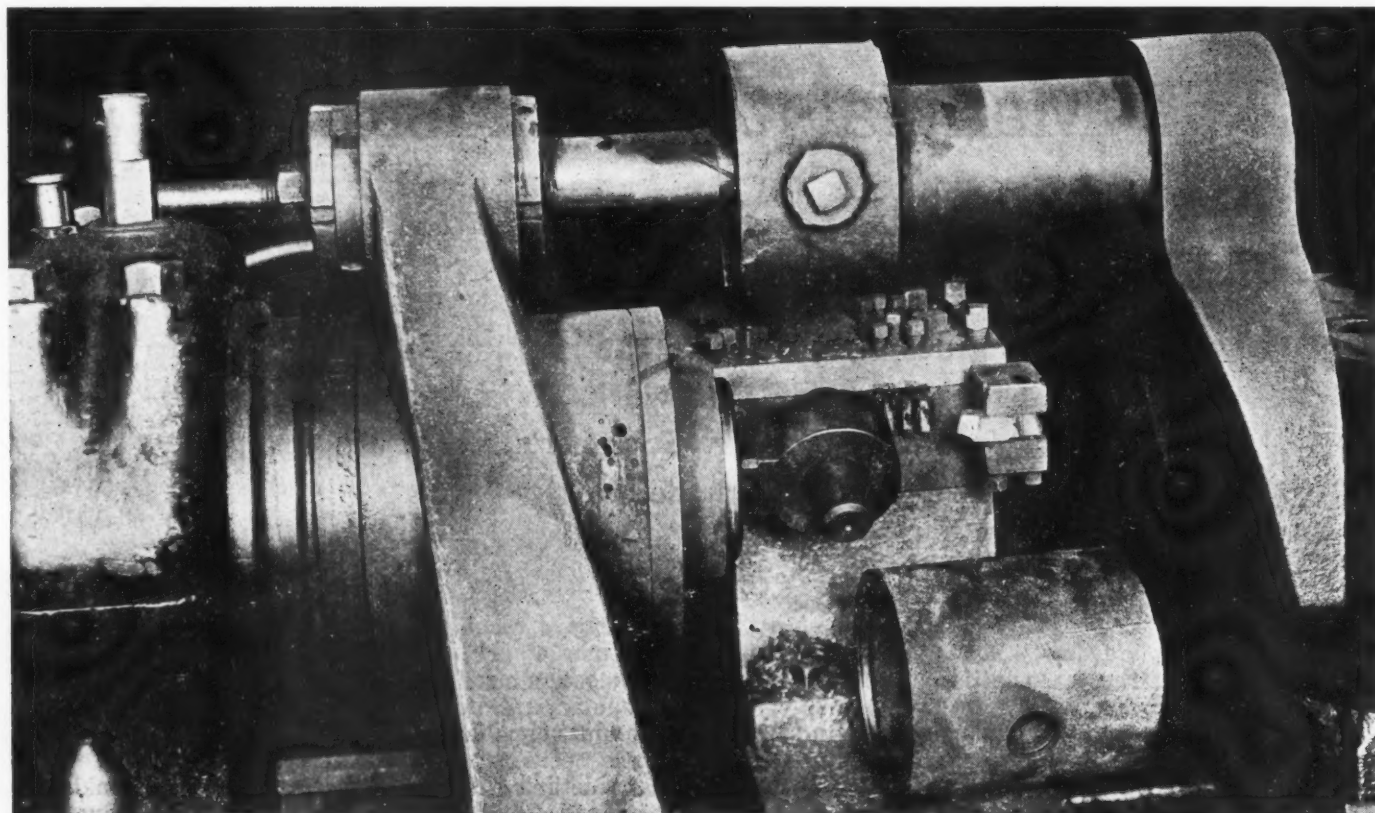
Above—Cross drilling for piston pin holes, locating from piston pin bosses on V-blocks in fixture. Fig. 3—Below—Rough turning piston head and diameter, holding piston by drawbar through piston pin boss, drawbar being pulled back against open end, locating operators from inside of piston
